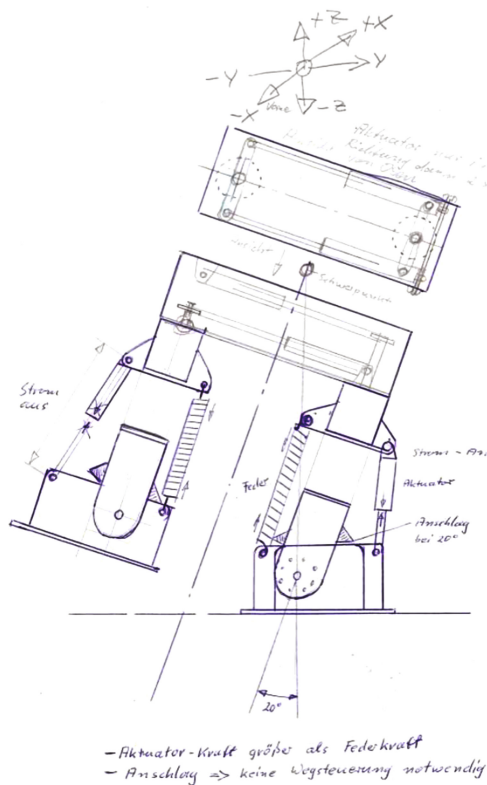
Engineering drawing of bipedal robot with linear actuators
